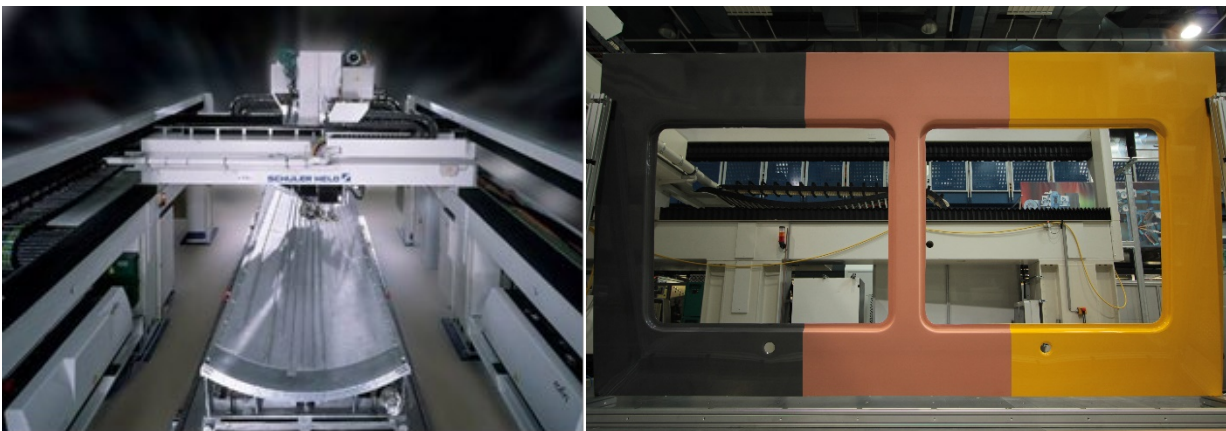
XXL welding machine at Fraunhofer IWS lab (left) and completed side wall demonstrator (right)
